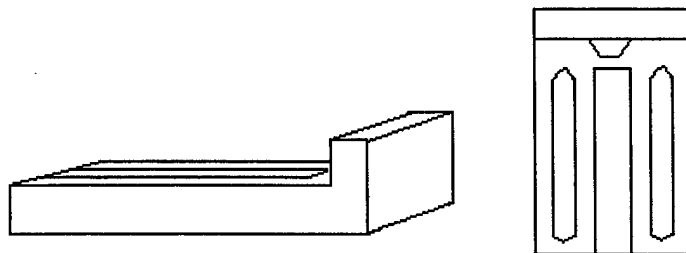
The final copper heatsink design to allow a laser already mounted on a Cs heatsink to be integrated into the module. The view on the left is from the side and the view on the right is from the top.
